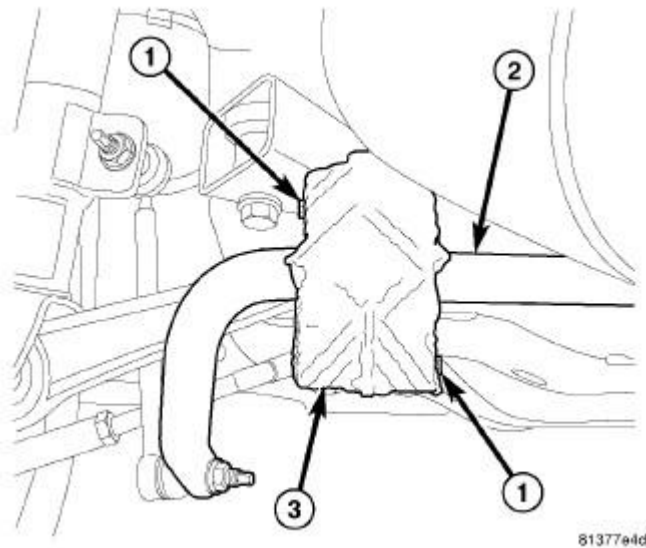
FRONT STABILIZER BAR HEAT SHIELD
